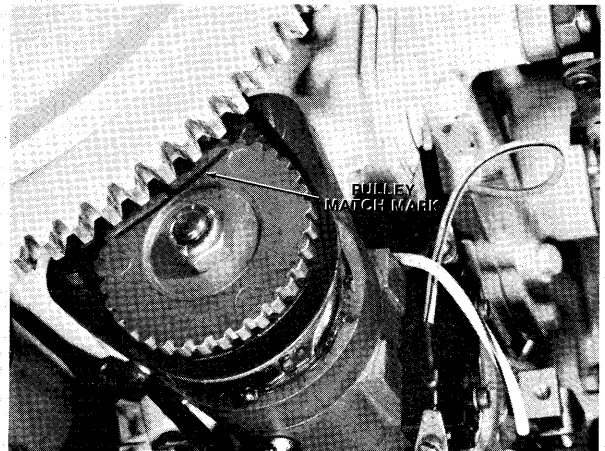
Aligning Distributor Pulley Match Mark With Flywheel
